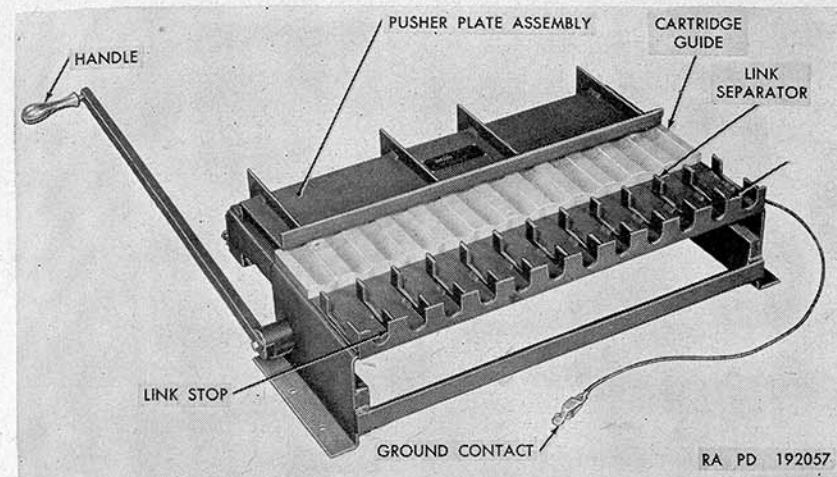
20-mm and cal. .60 linking machine T38—front view.
